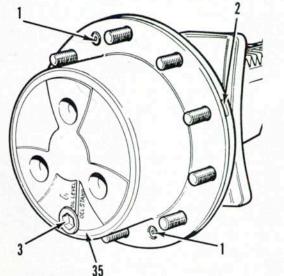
To remove planetary carrier (35), remove two retaining screws (1) and insert pry bars in the two slots (2).
